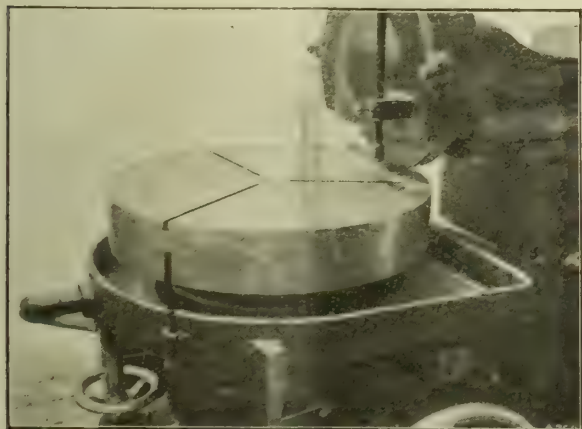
A Humphrey Magnetic Chuck fitted to a Churchill Grinder.
